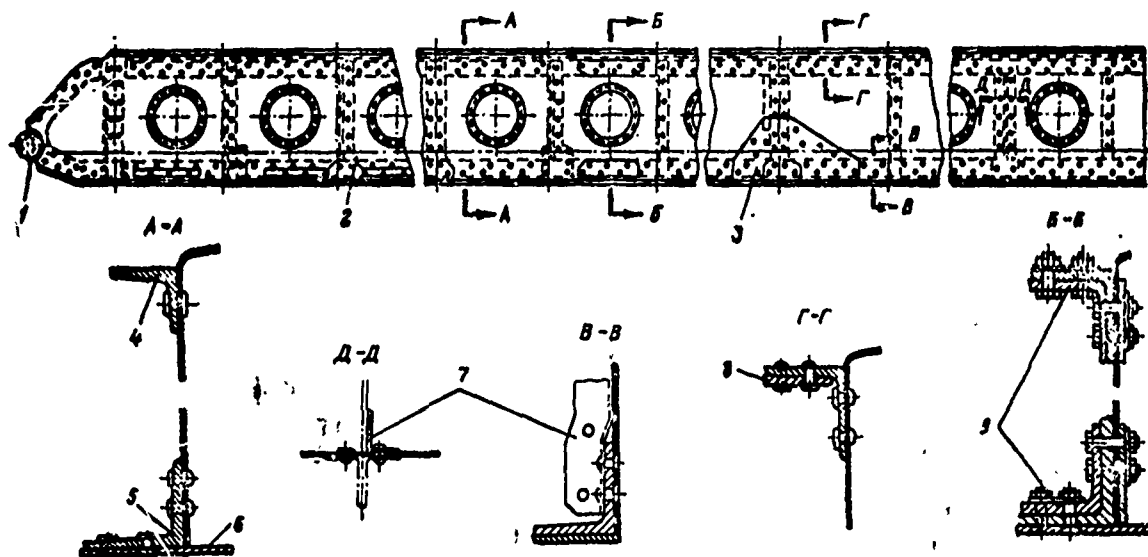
Front spar of the upper wing: 1 - attachment fitting; 2 - spar web; 3 - cover plate; 4 - upper spar flange; 5 - lower spar flange; 6 - cover plate; 7 - nose attachment angles; 8 - cover plate; 9 - fish pieces.
